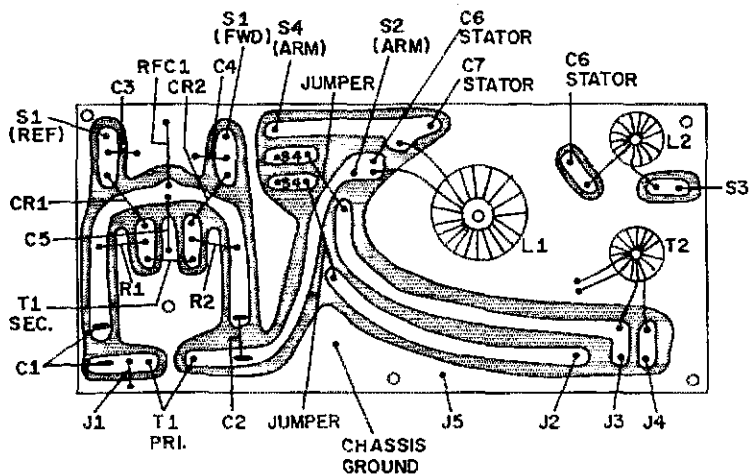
Half-scale drawing and parts layout of the circuit board. Ready-made circuit boards for this and other QST projects are available from Stafford Electronics, Inc., 427 S. Benbow Rd., Greensboro, NC 24701.
